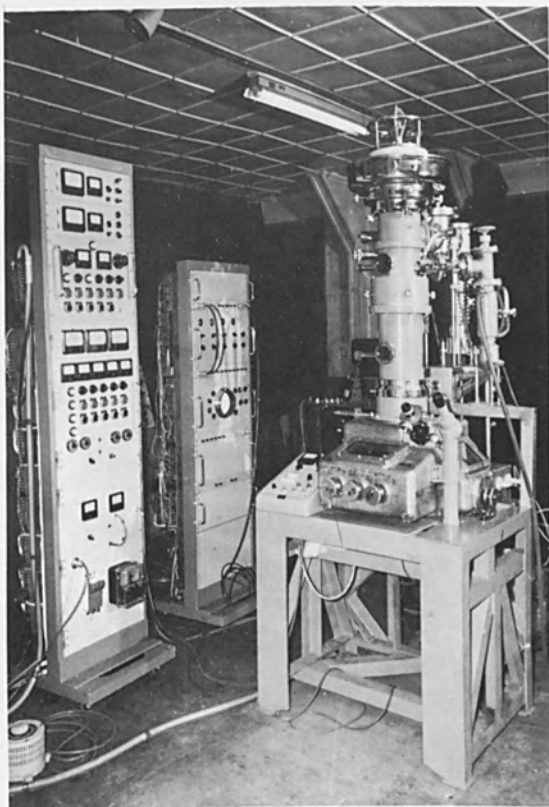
Photograph of The Electron Beam Milling Machine of Our Laboratory
